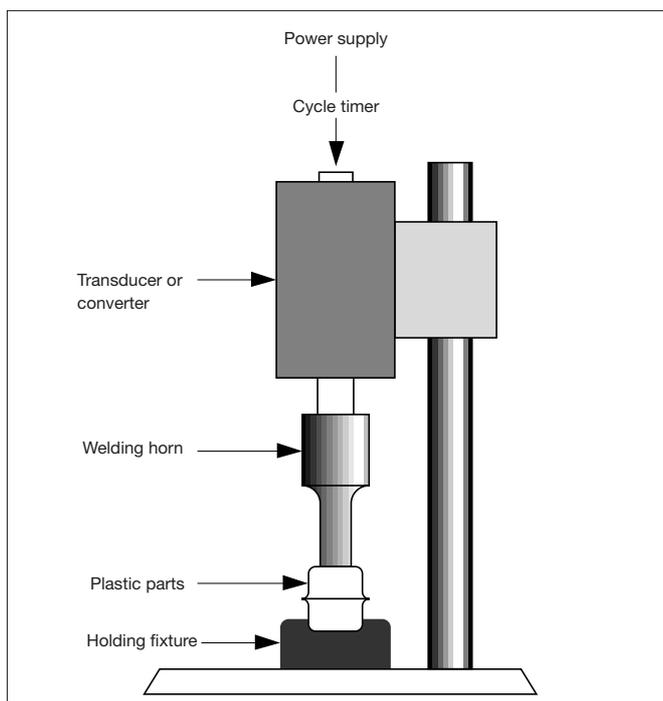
Components of ultrasonic welding equipment
